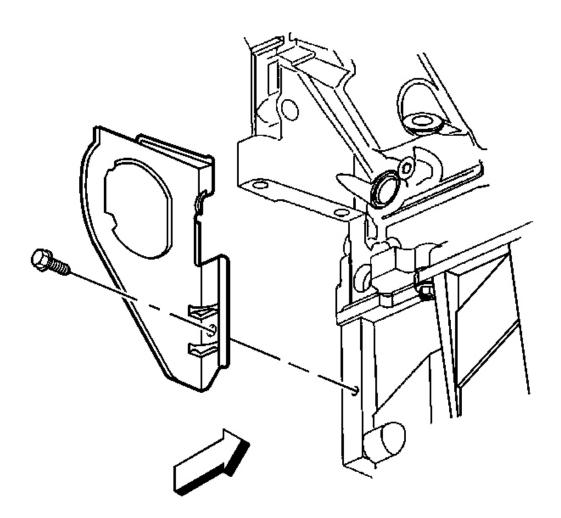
View Of Right Transmission Closeout Cover & Bolt Courtesy of GENERAL MOTORS CORP.
